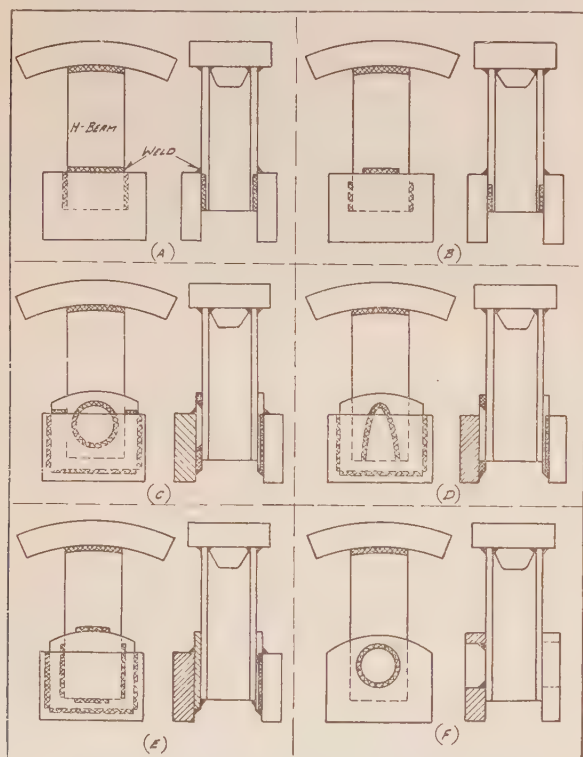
SPECIMENS TESTED ON VIBRATION MACHINE
